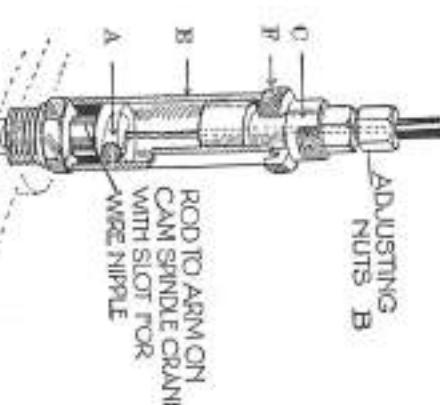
DETAILS OF THE EXHAUST VALVE LIFTER USED ON ALL EXCITER "HORN CAMSHAFT" ENGINES
